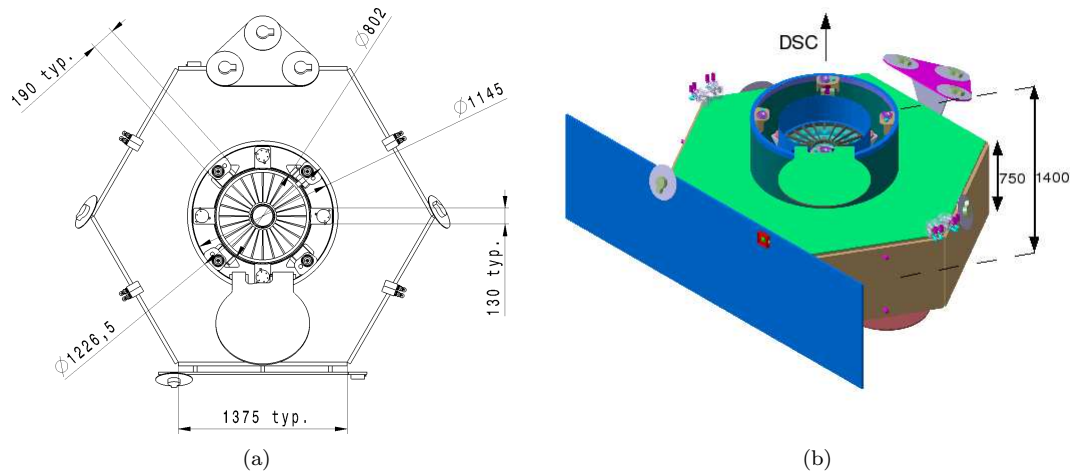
a): Face-on MSC geometry and main dimensions (masures in mm). b): 3D view of the spacecraft with height dimension (masures in mm). The arrow shows the DSC direction on flight.
